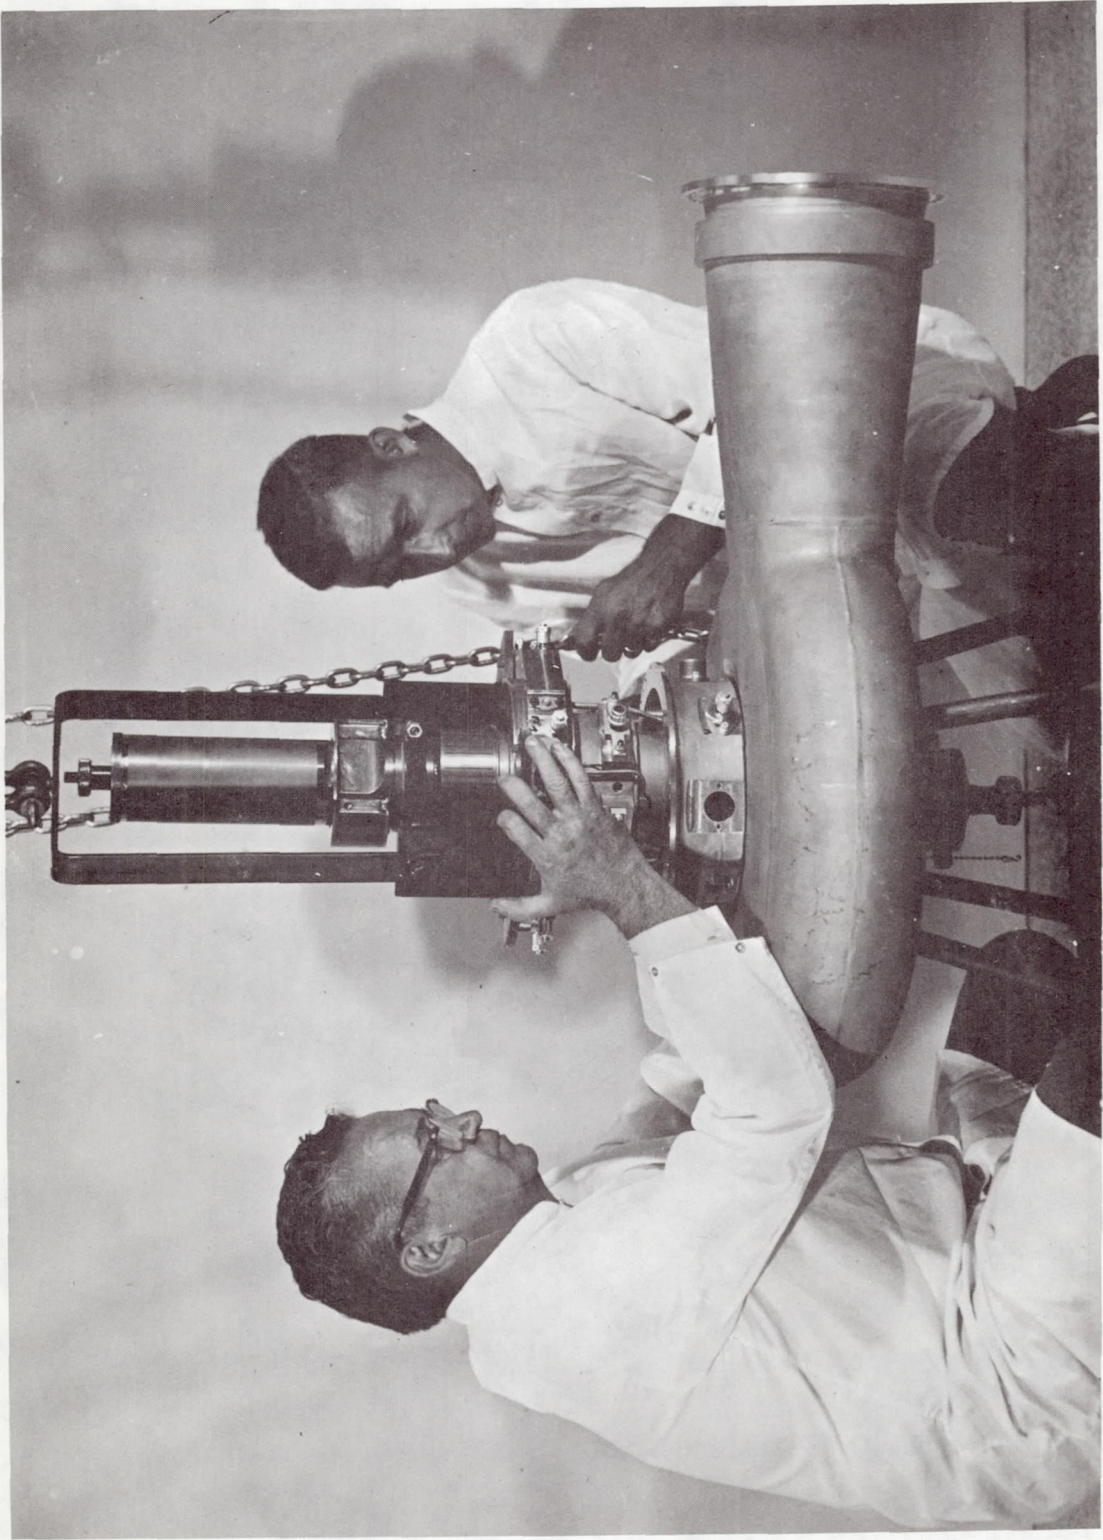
Installing Front Bearing Assembly into Turbine Scroll (CN-9352)
